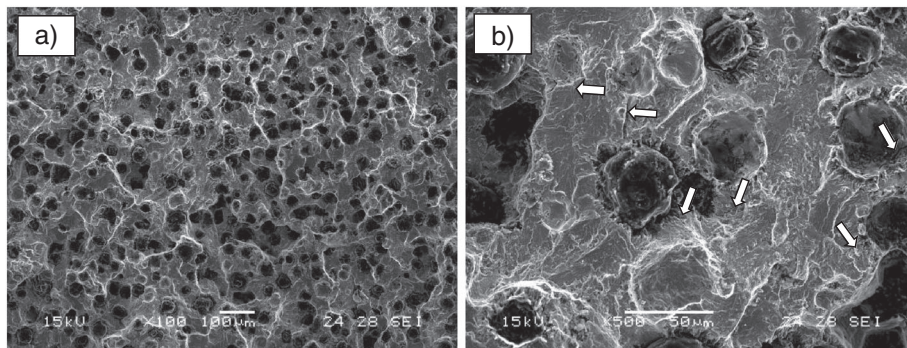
Fracture surfaces of the specimens broken under the high-cycle fatigue regime. Different magnifications.
